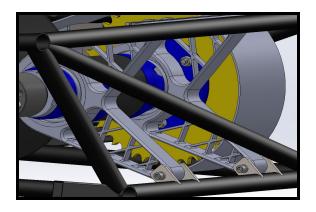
Differential mounts fastened to bottom tabs that are welded to the frame.
